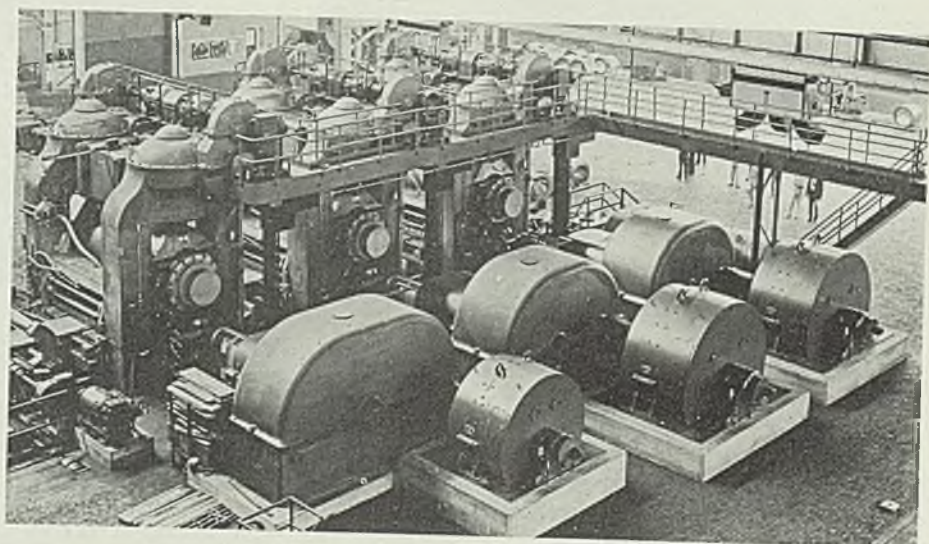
Modern 3-stand 98-inch cold mill uses three motors totaling about 6500 horsepower
